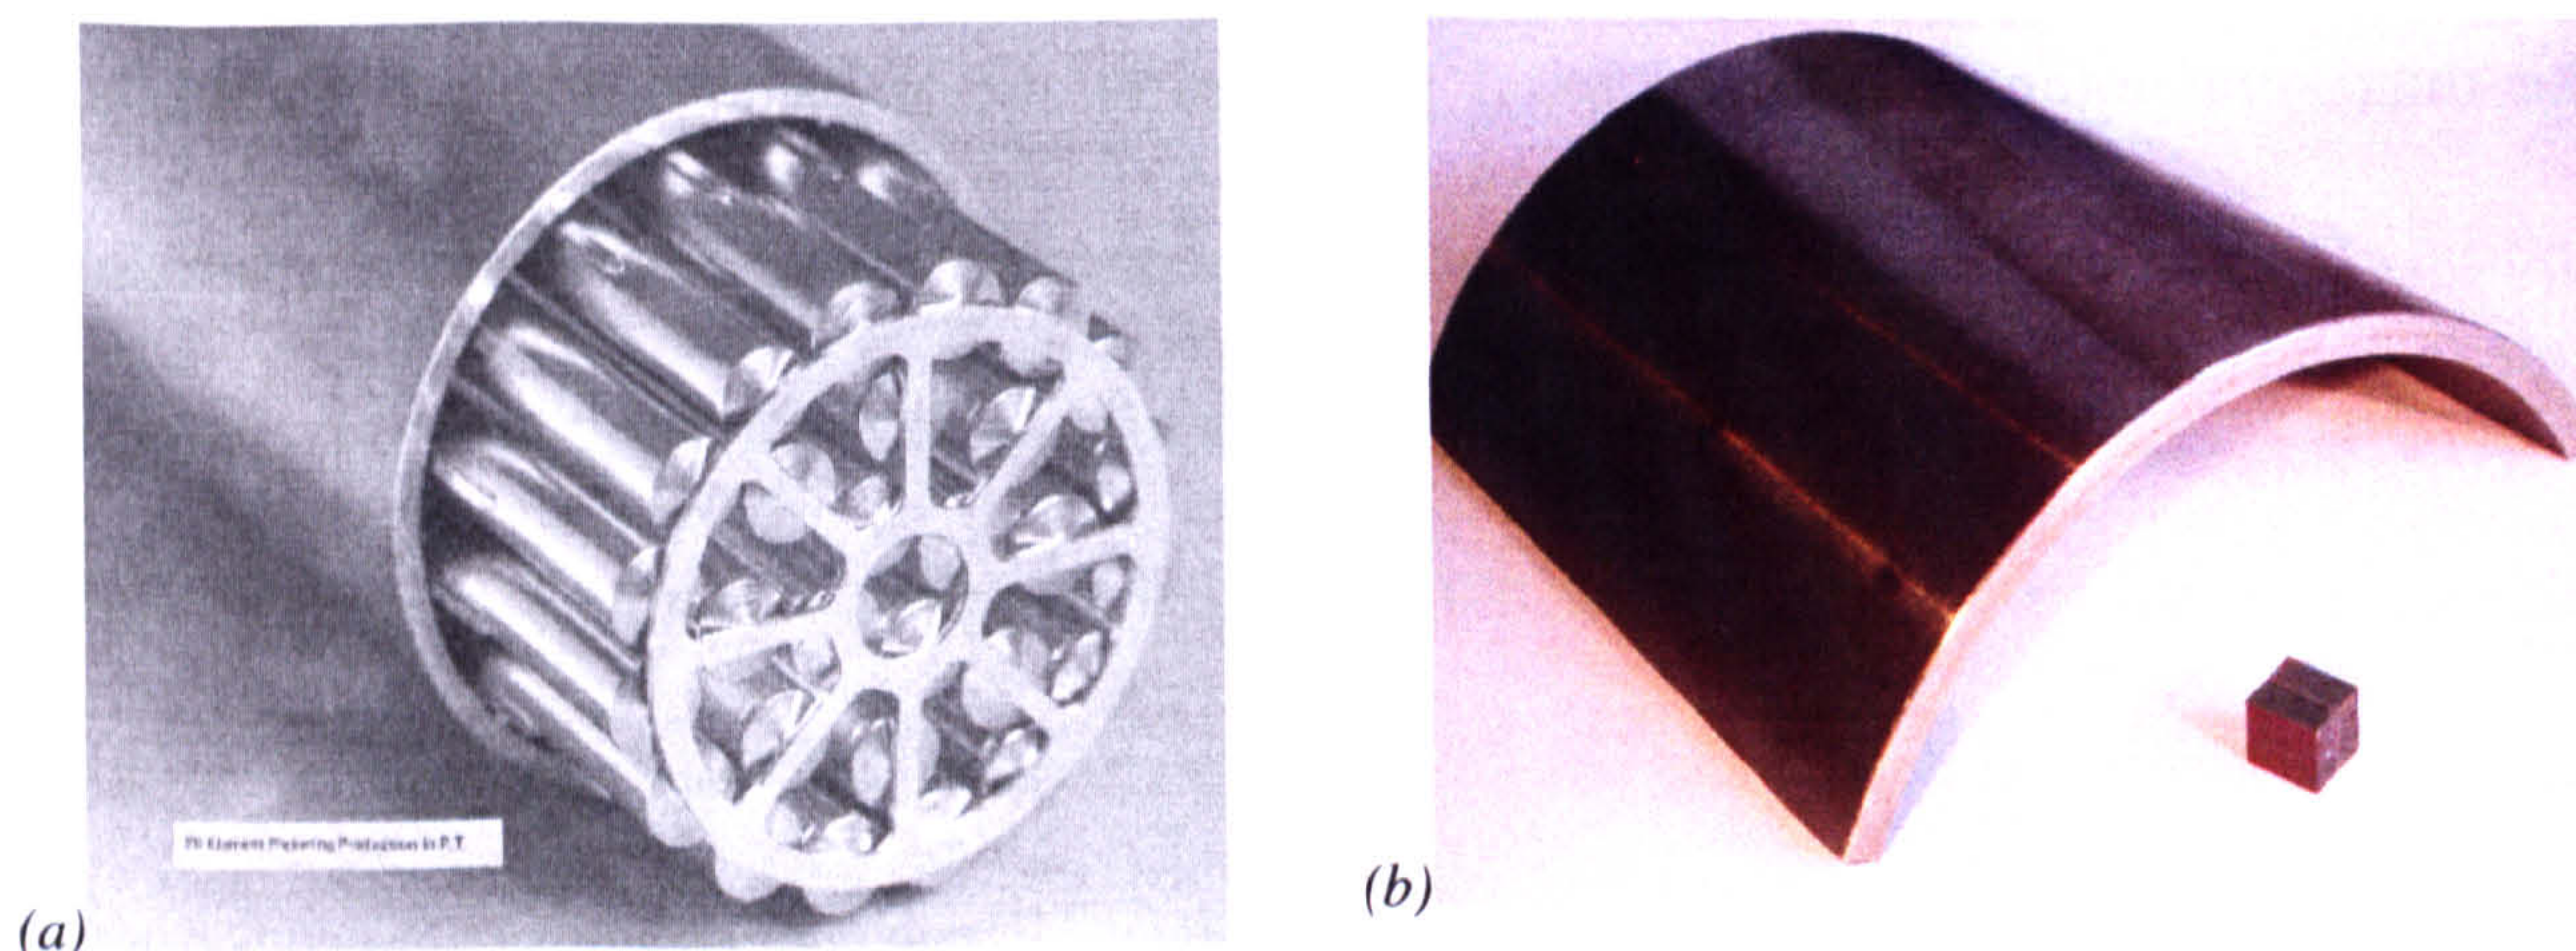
(a) Pressure tube with bundle [63] and (b) piece of pressure tube and sample as used in Chapter 5
